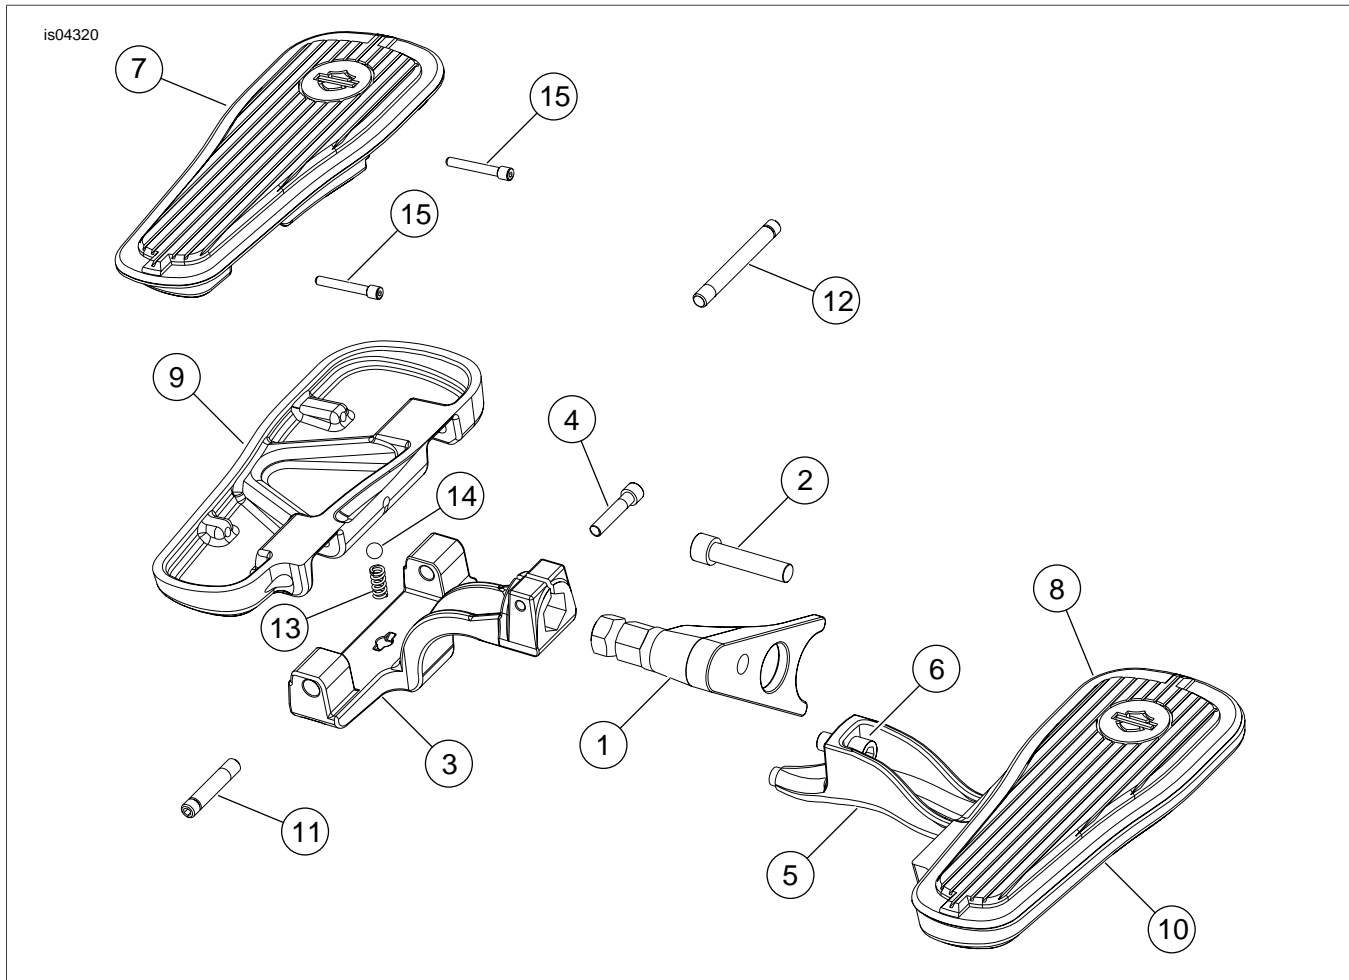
Service Parts: Crested Bar and Shield Passenger Footboard and Mount Kit
